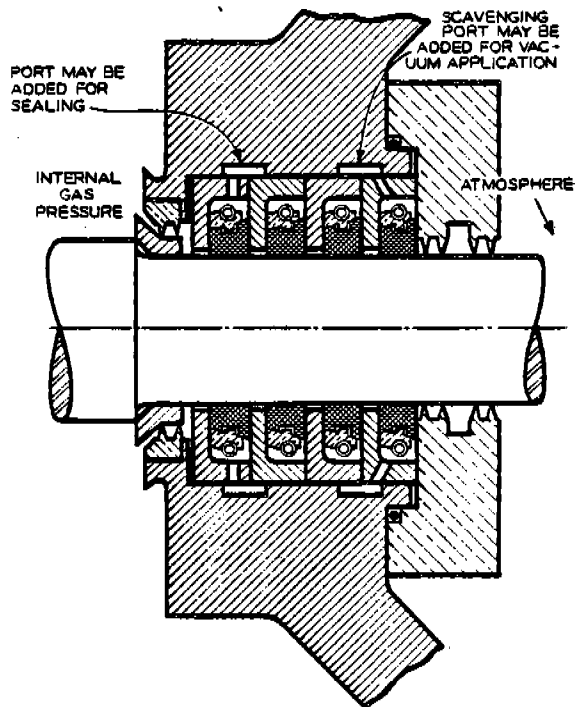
Restrictive-ring Compressor Shaft Seal.
